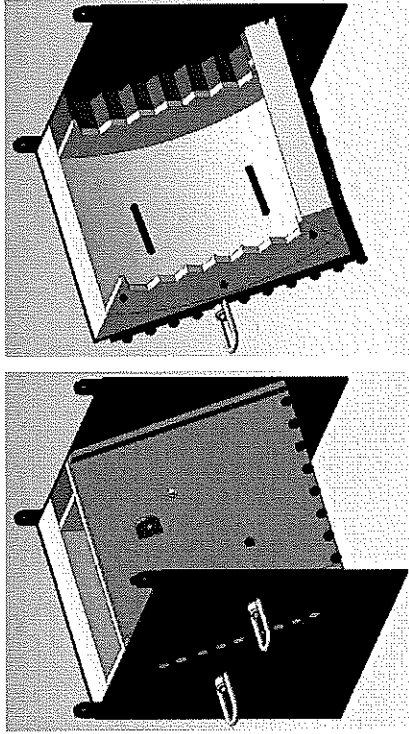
RENDER OF THE PSR MOLD IN THE "LOWER CORE OUTER REFLECTOR" CONFIGURATION: FULL ASSEMBLY (LEFT) AND FRAME WALL, MOLD CAP, AND INSIDE PLATE REMOVED FOR CLARITY (RIGHT).
